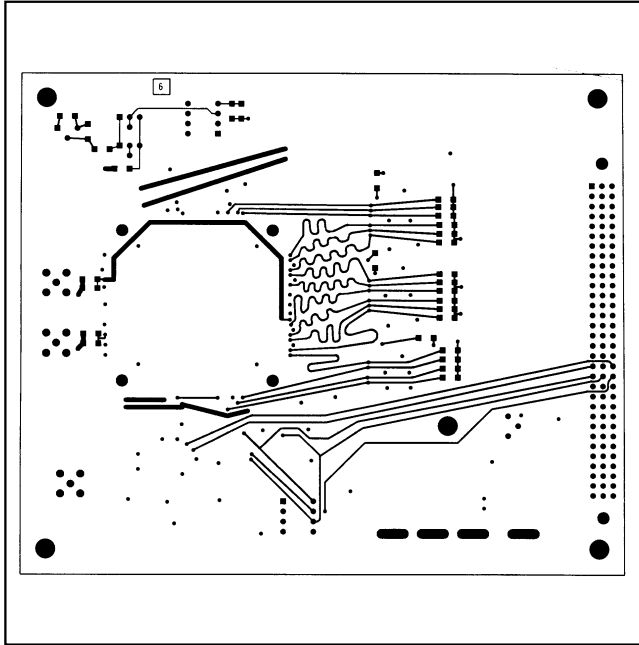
Main Board Layout—Copper Layer 6 (Bottom)
